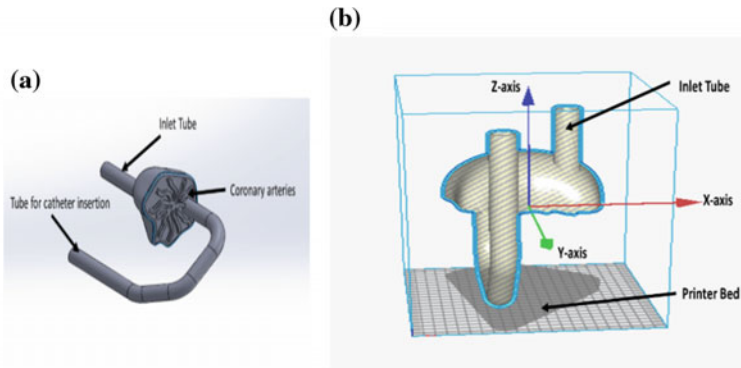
a Development of heart model using solidworks. b Tool path creation using Ultimaker Cura 3.0.4
